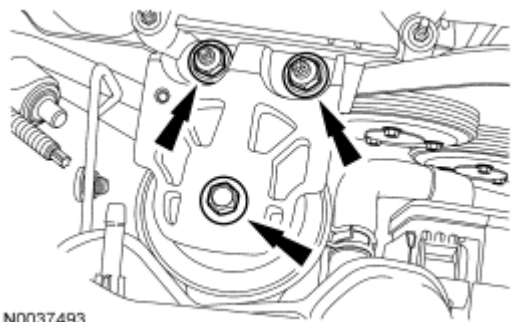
Locating Engine Mount Bracket Bolt And Nuts
